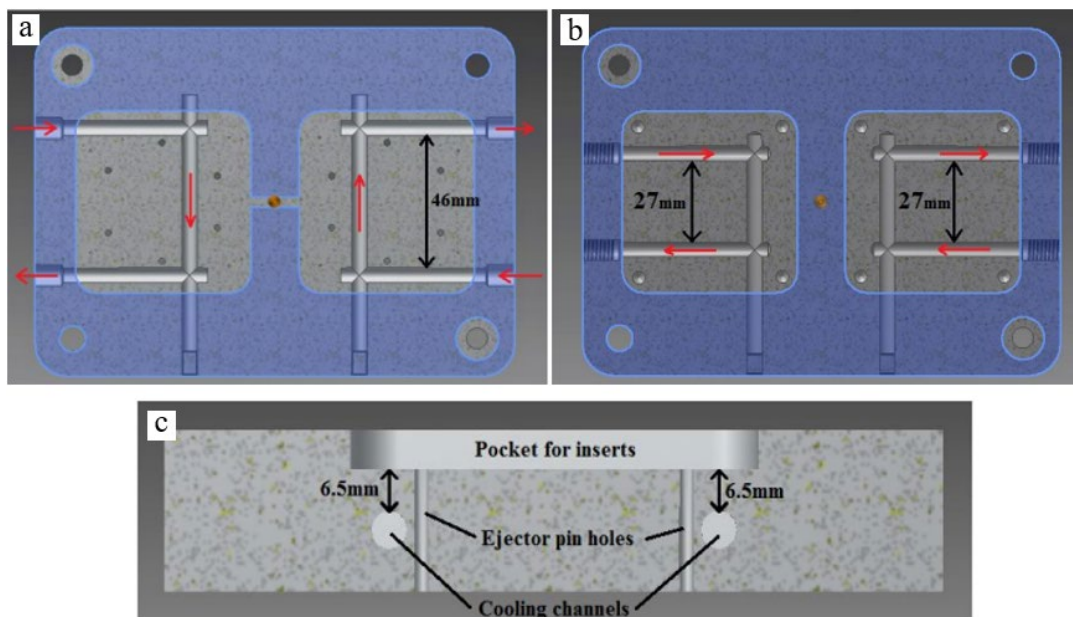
Cooling channel layout on ejection (a) and injection side (b) of the mold as well as the cross-sectional view of ejection side (c).
